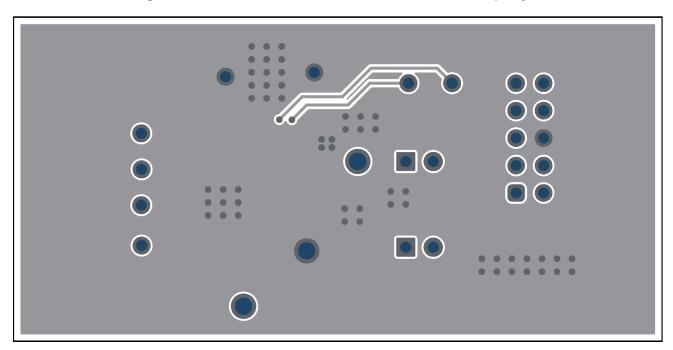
LP5814DRLEVM and LP5814YCHEVM PCB Bottom Layer
